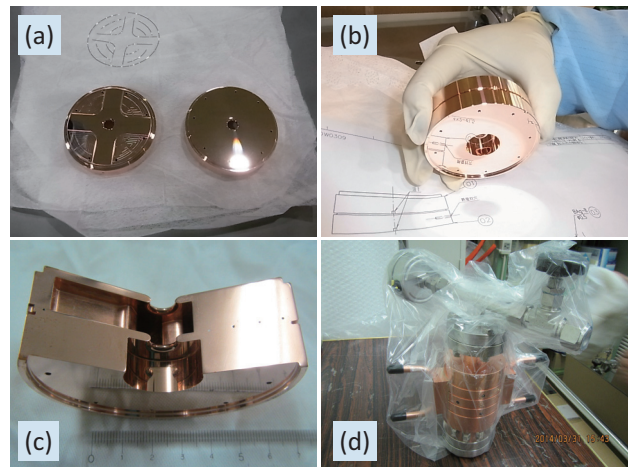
Test cavity with HOM waveguides, where disks were bonded by brazing. (a) Brazing filler metal and grooves. (b) Test brazing of two disks. (c) Checking the brazing performance. (d) Just after the delivery.
